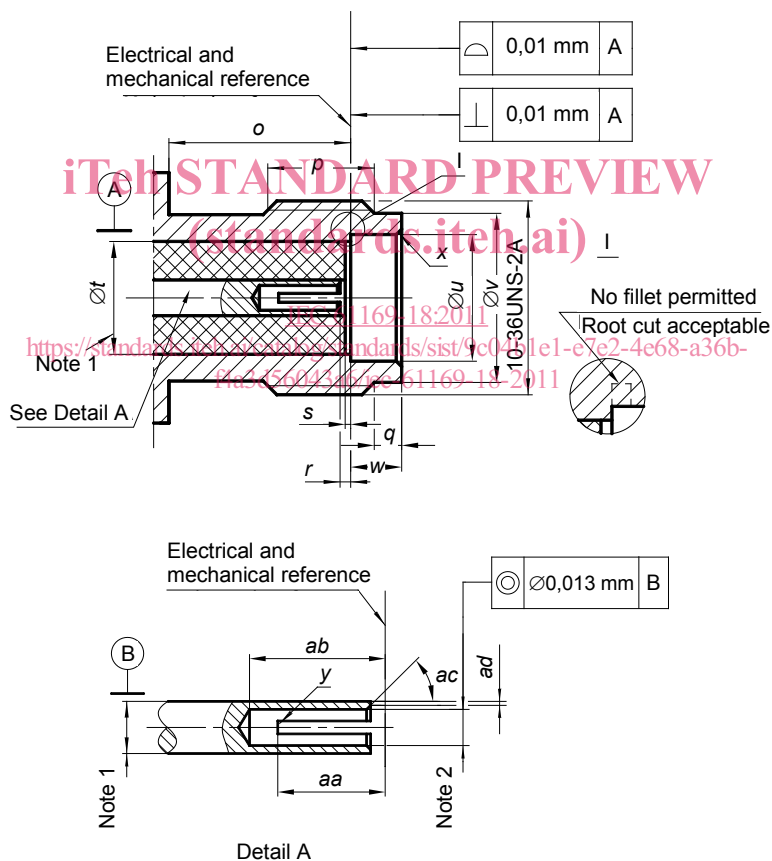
Connector with socket-centre contact (for dimensions and notes, see Table 5)
